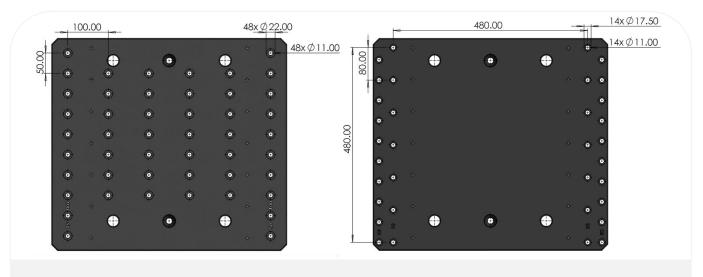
Mounting interfaces of the 8U and 16U TestPod
